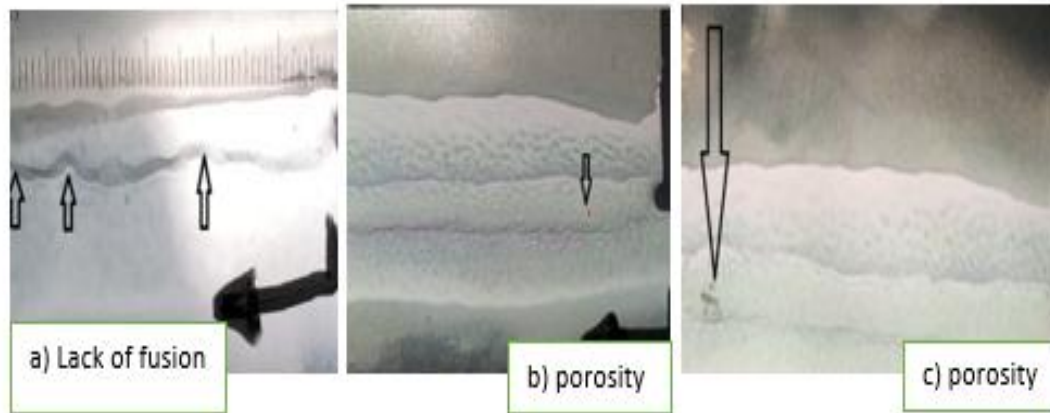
defects on similar weld metal: a) sample no.1, b) sample no.2, and c) sample no.9
